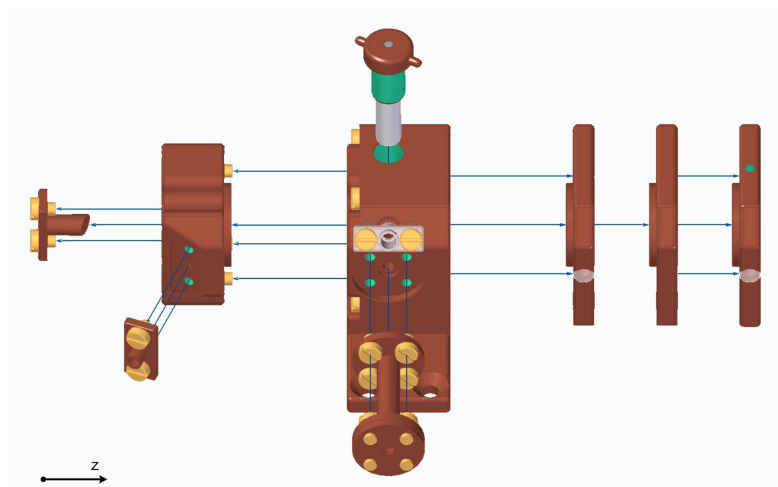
Exploded view of the buffer gas cell. All modular parts can be replaced by different options.
